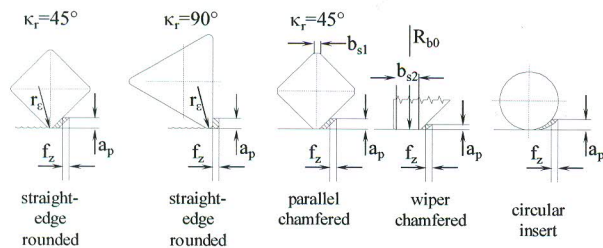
Typical forms for milling cutter inserts used in the face milling and their topography
